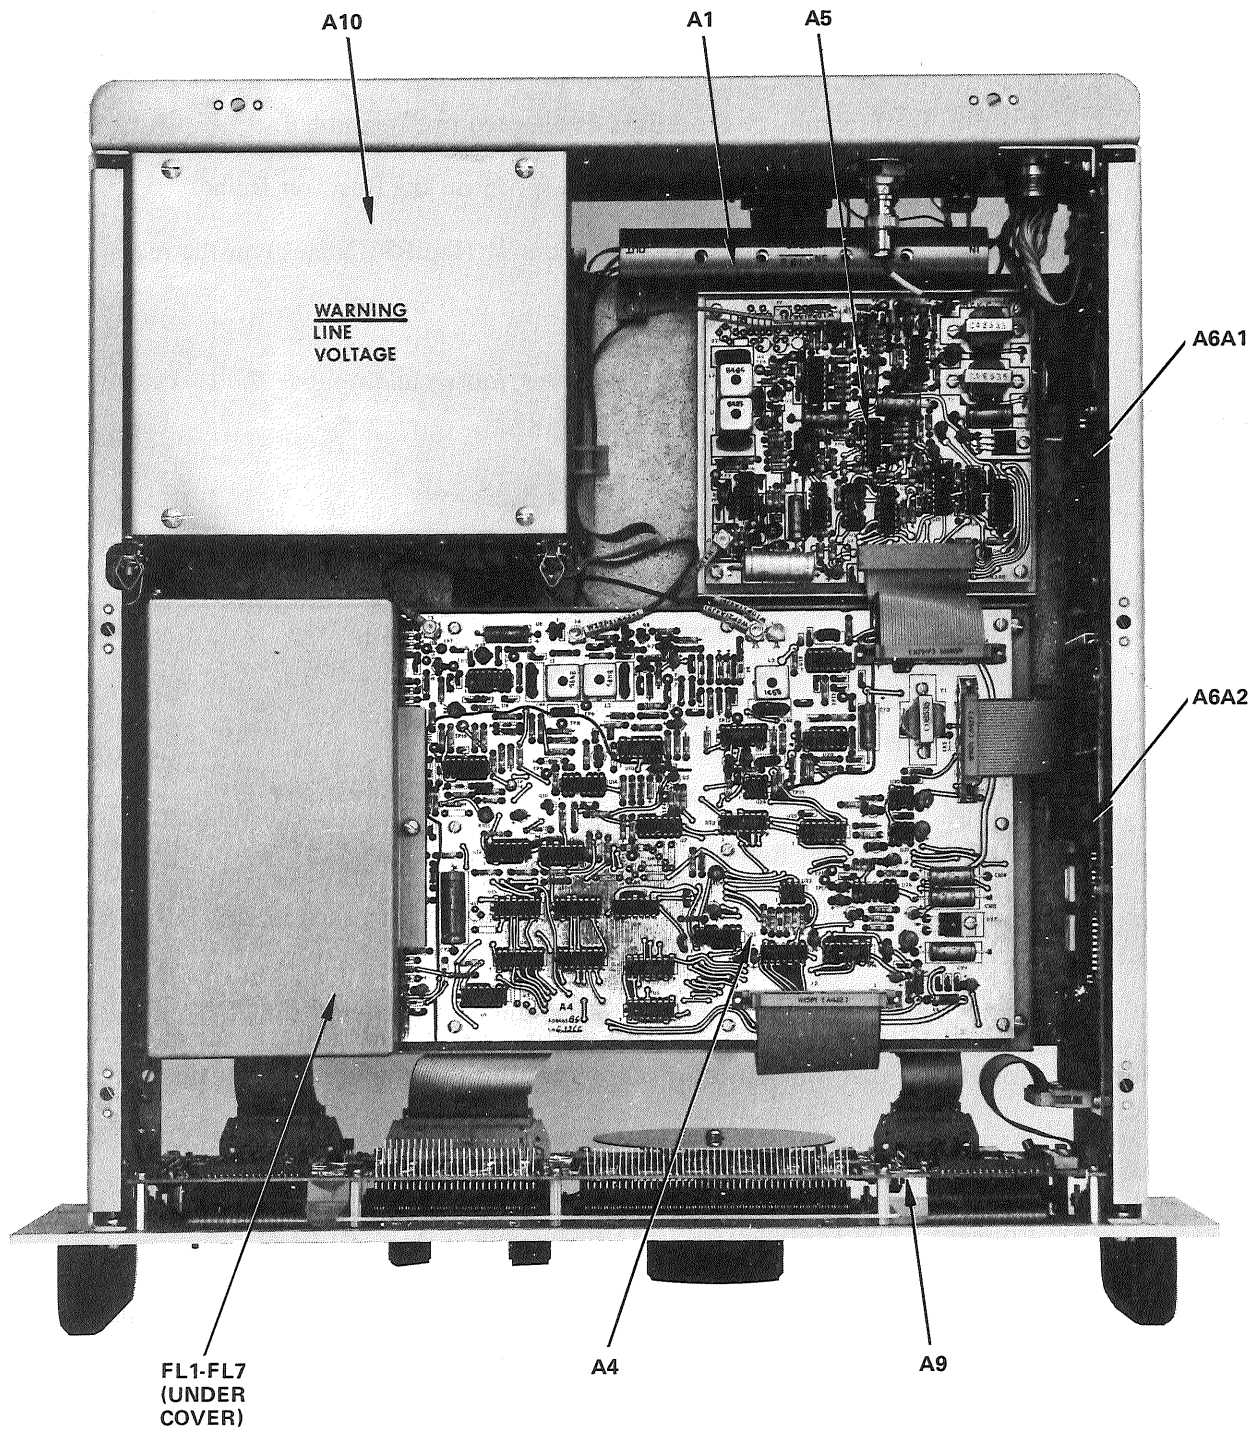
Receiver R-2174 (P) URR, Top View, Cover Removed
